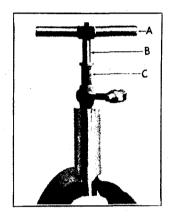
Valve Rocker Arm Bushing Press 89077: Installing Bushing.
